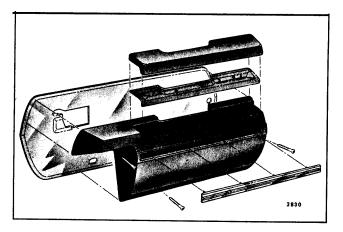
Applied Type Door Arm Rest "B" Styles Shown
